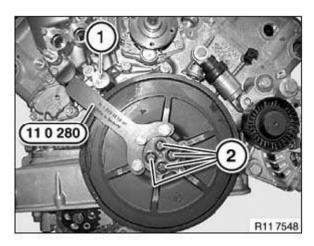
Identifying Special Tool (11 0 280) On Holder Courtesy of BMW OF NORTH AMERICA, INC.
